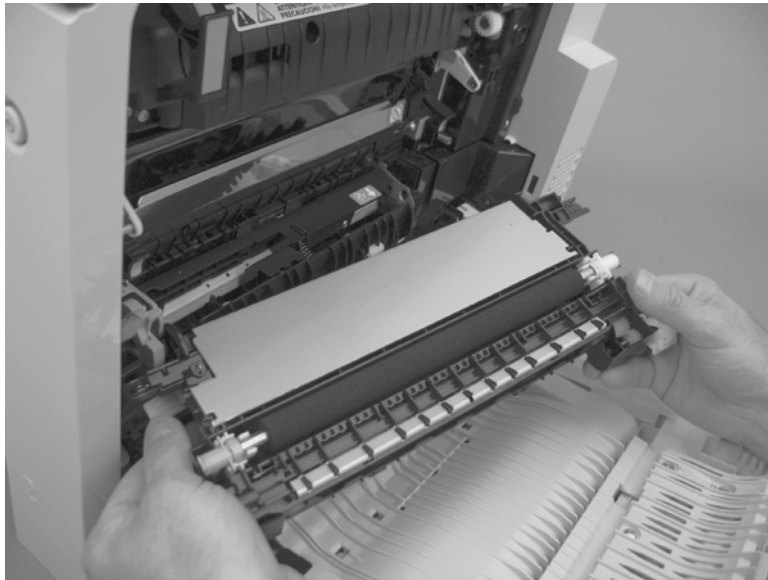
Remove the secondary transfer assembly (2 of 3)
